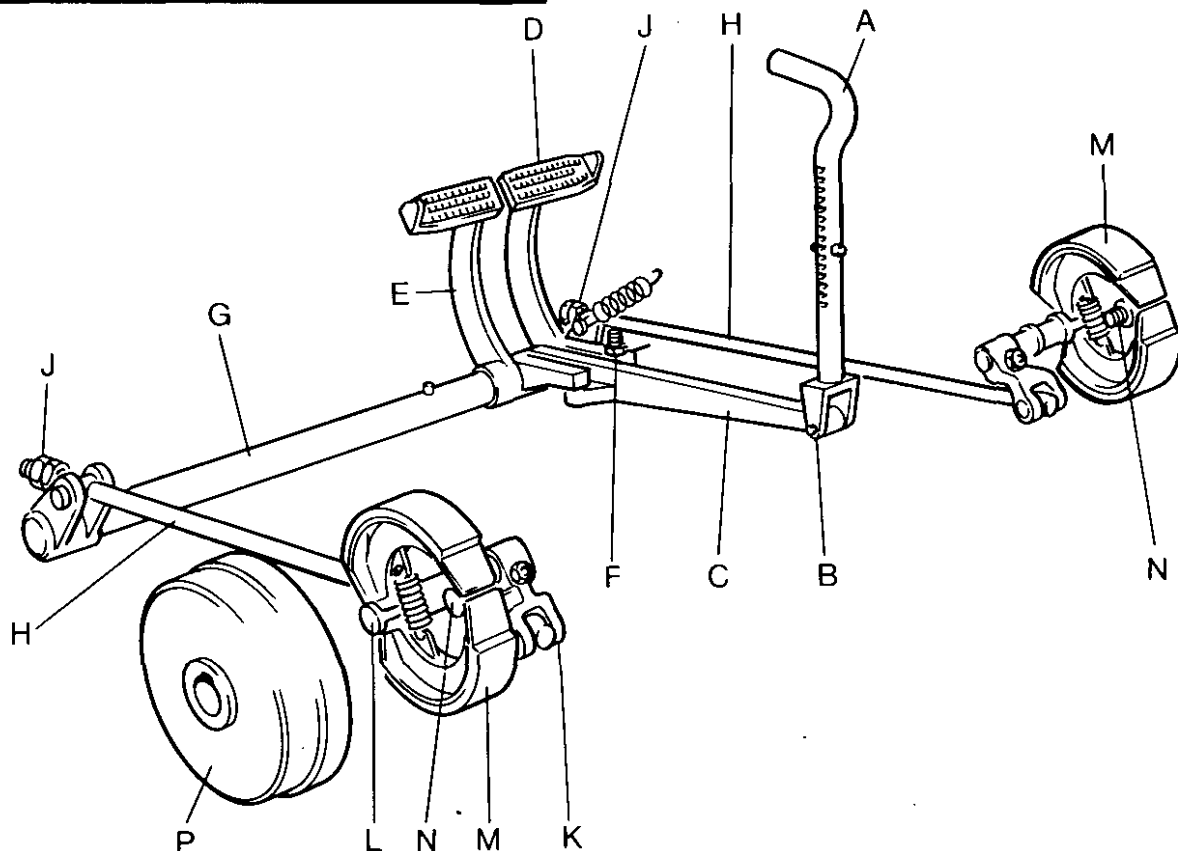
BRAKE MECHANISM ARRANGEMENT
